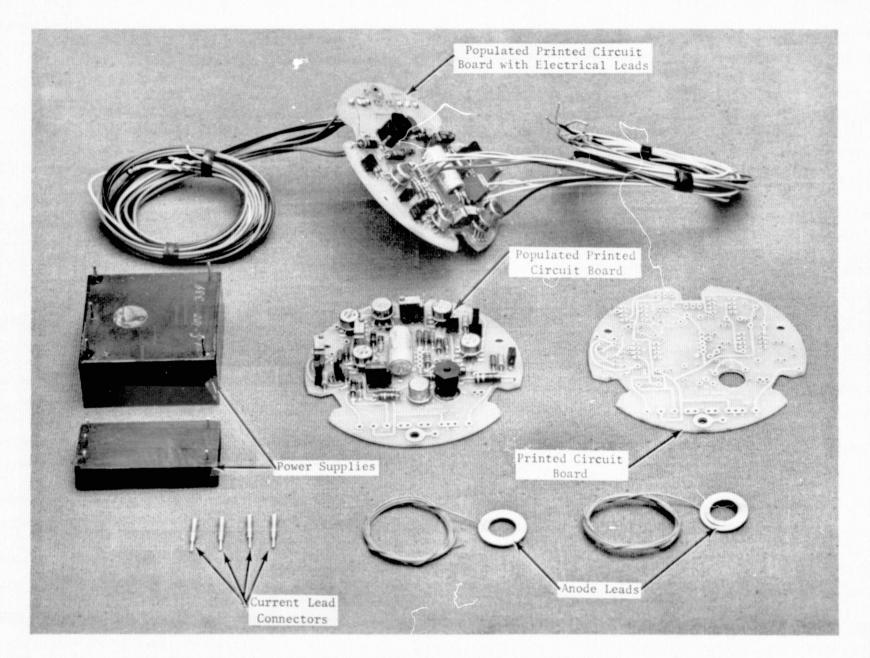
AWIS  $\mathbf{I}_2$  VALVE ELECTRONICS ASSEMBLY AND COMPONENTS
